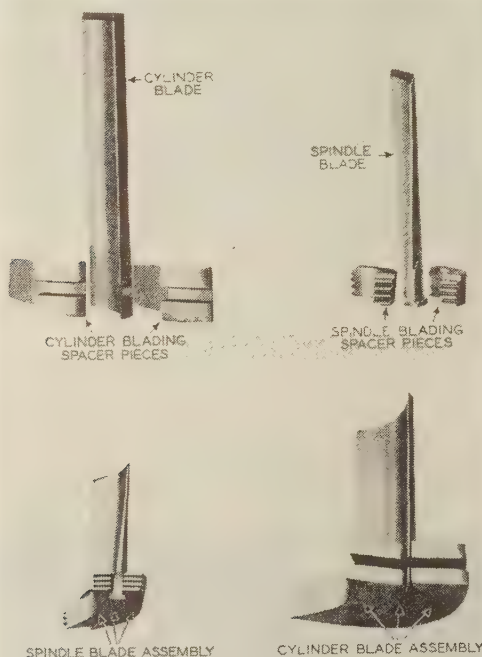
STAINLESS-STEEL CYLINDER AND SPINDLE BLADING FOR THE GAS TURBINE
